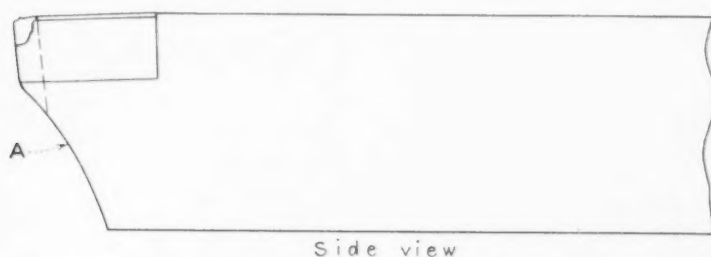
In regrinding a carbide tool that is badly chipped, it is best to grind away the steel shank under the broken portion, using a wheel suitable for rough grinding steel. This leaves a minimum of grinding to be done with the soft carbide wheel.
